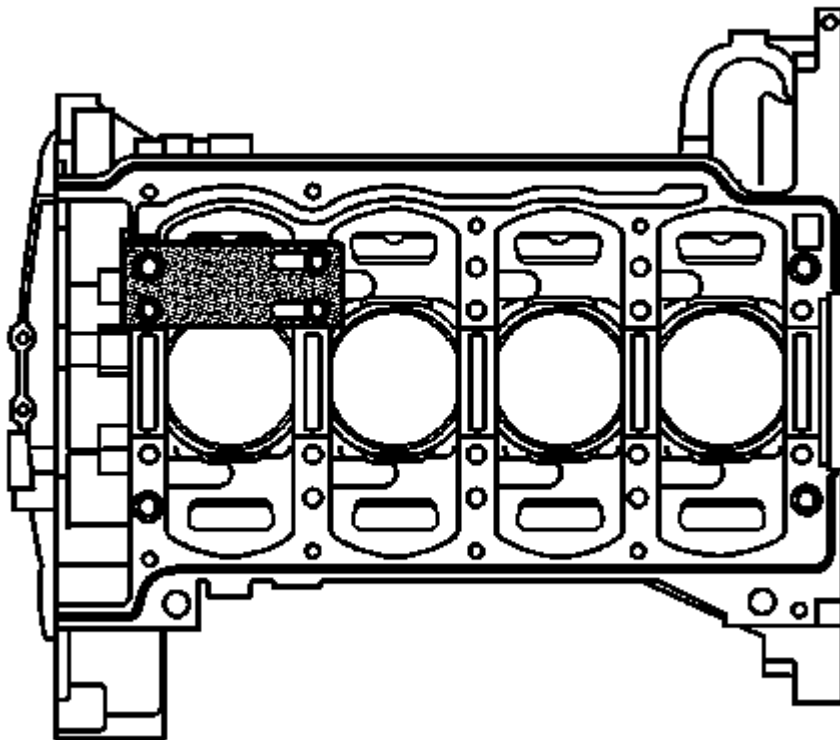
Installing Fixture Plate, Bolt, & Bushing Onto Engine Block
